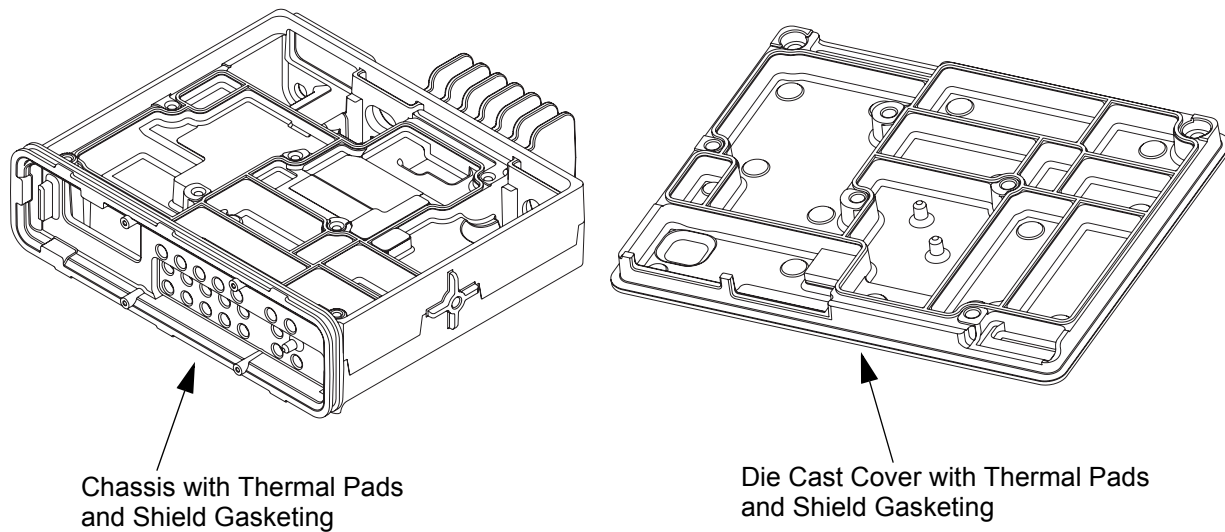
Thermal Pads and Shield Gasketing on Chassis and Die Cast Cover
